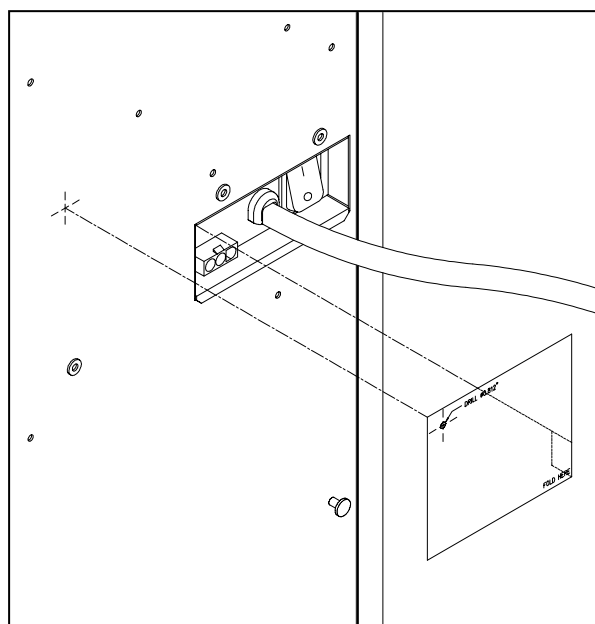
Fold the bottom right corner of the smaller template, line it up against the top left corner of the fuse box and mark the hole to be drilled at the rear of the machine.
